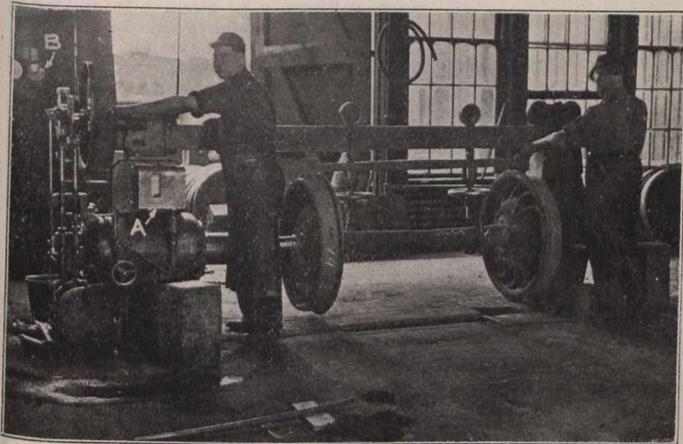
Car Wheel Press with Recording Pressure Gauge.
